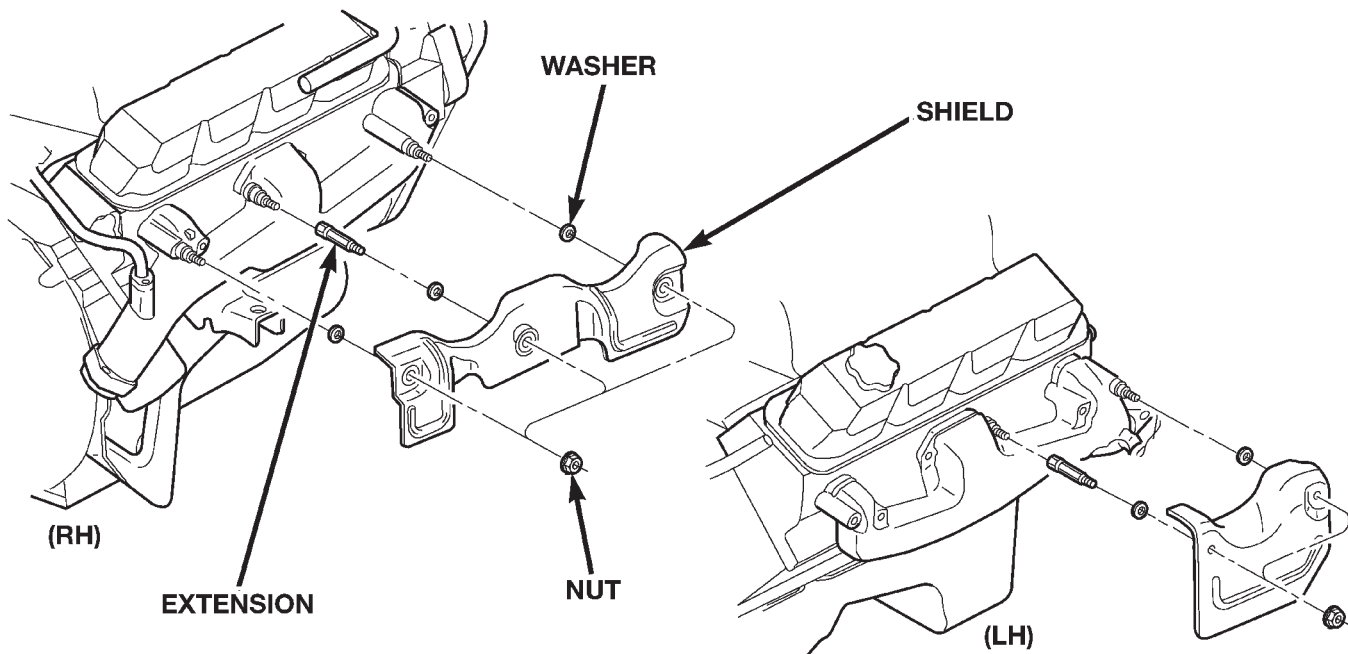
Exhaust Manifold Installation—5.2L/5.9L Engines
